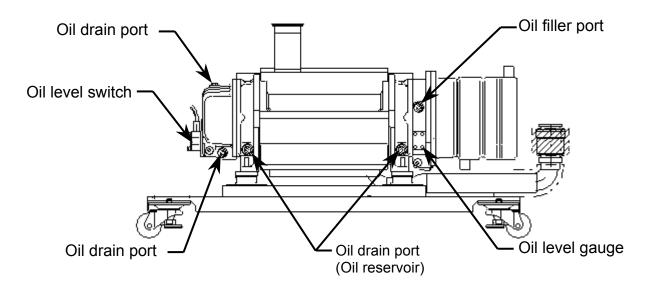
Oil filler port, oil level gauge, and oil drain port positions (See from the right-hand side to the utility)
